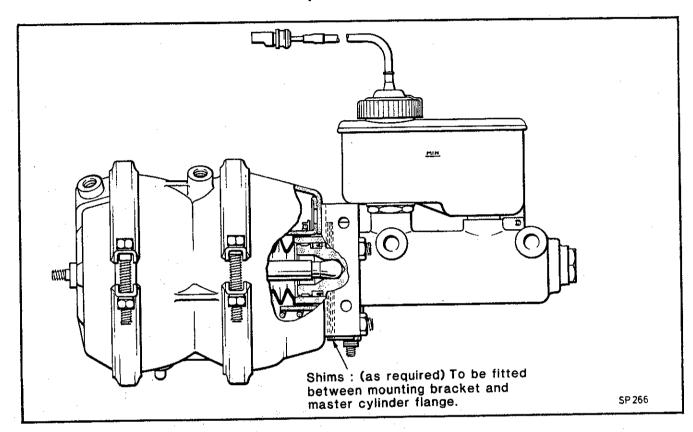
Assembly of Tandem Actuator and Master Cylinder.
